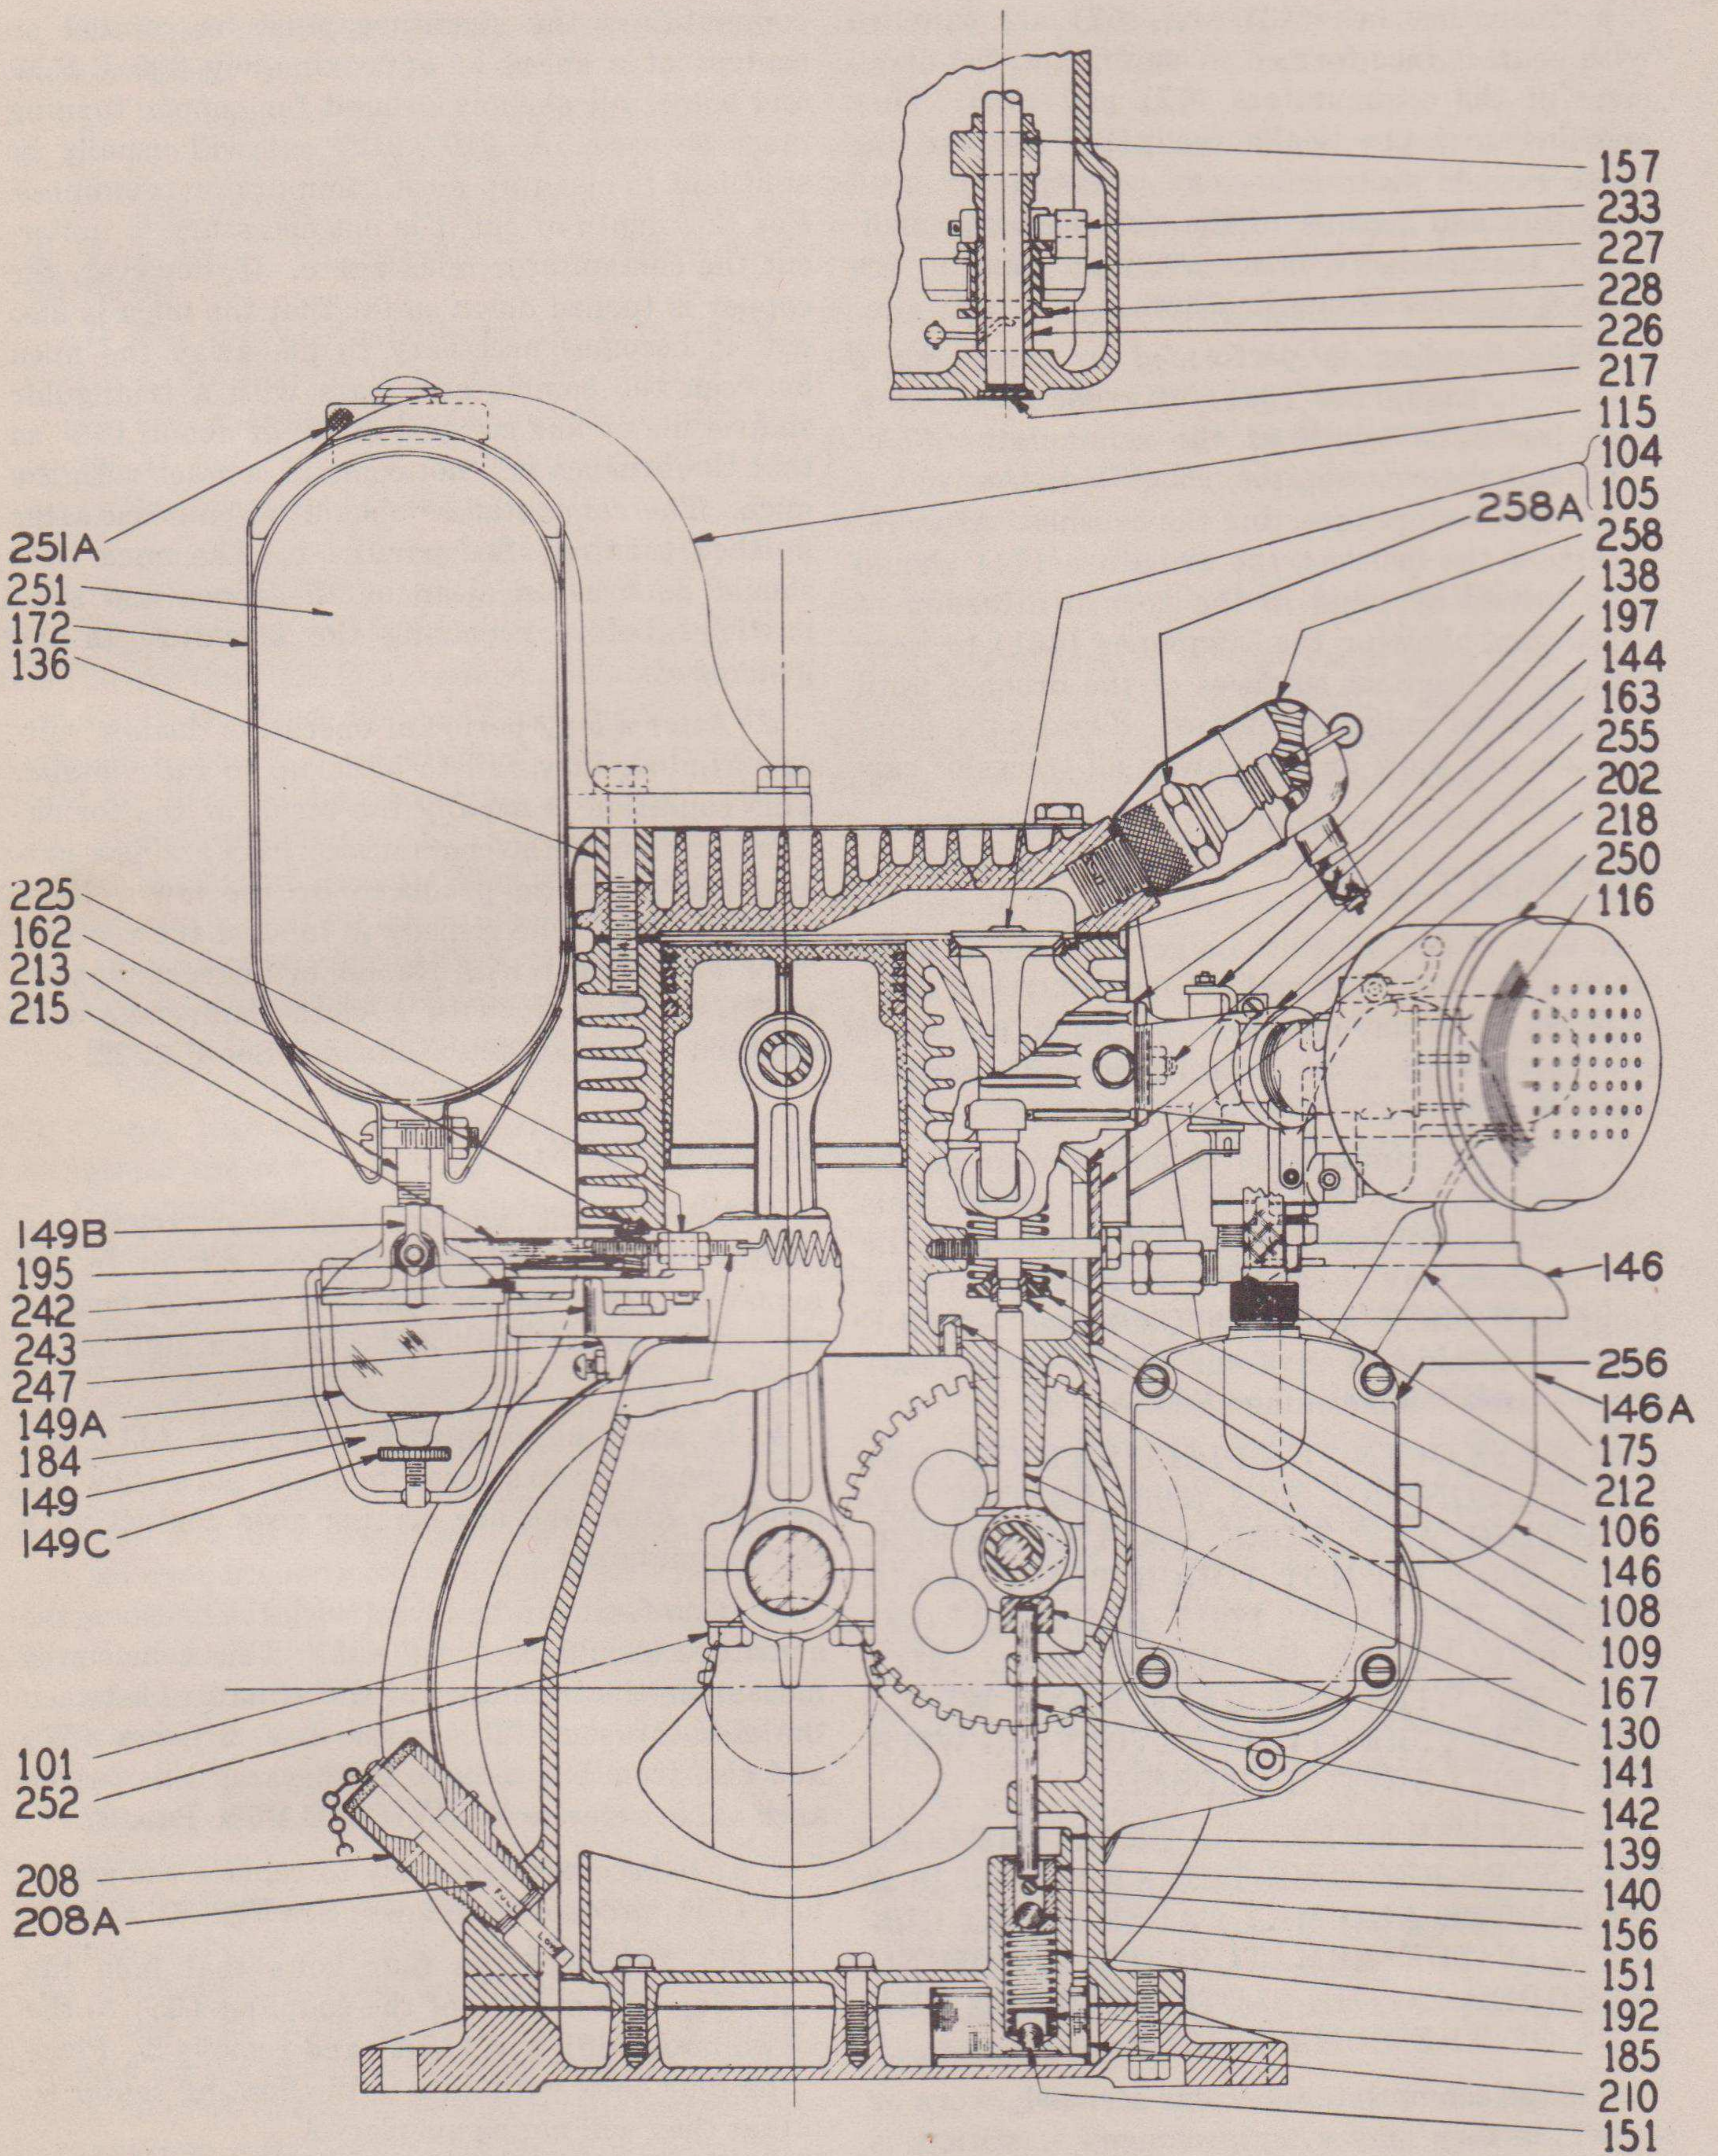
ENGINE GE-9-F—CROSS SECTION END VIEW
